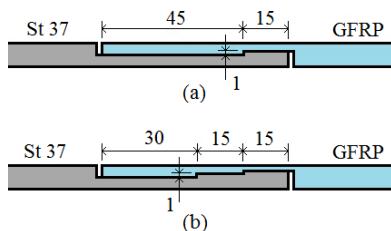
Schematic of the stepped specimens geometry, a) with one reverse step, b) with two reverse steps (dimensions in millimeters)
